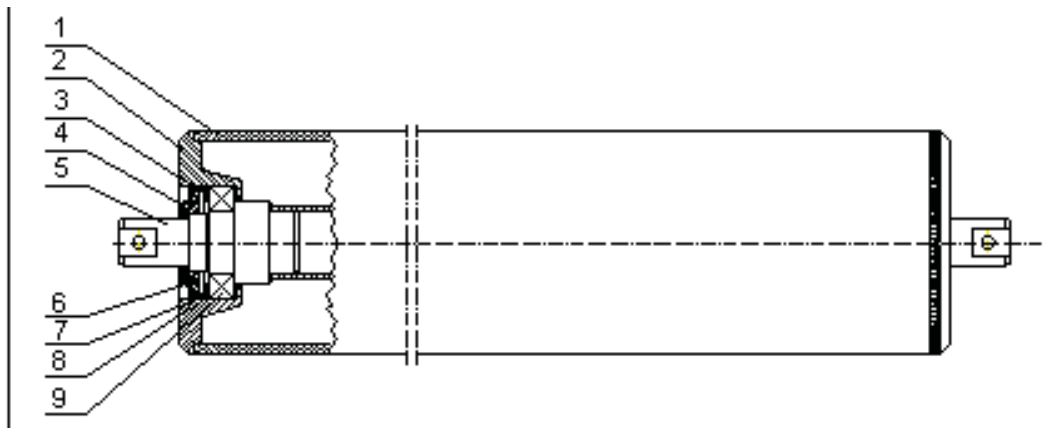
Bearing roller (1. cylinder part of the roller body; 2. lateral side of the roller body; 3. internal sensor elements; 4. shield; 5. shaft; 6. cover; 7. sealing ring; 8. oil sealing oil ring; 9. ball bearing).
